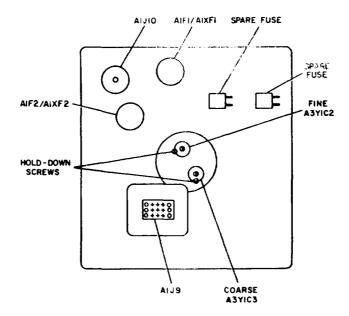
Counter Front View, with Converter Removed, Location of Fuses and Oscillator Adjustments PARTS LOCATION INDEX FOR FIGURE 5-39
